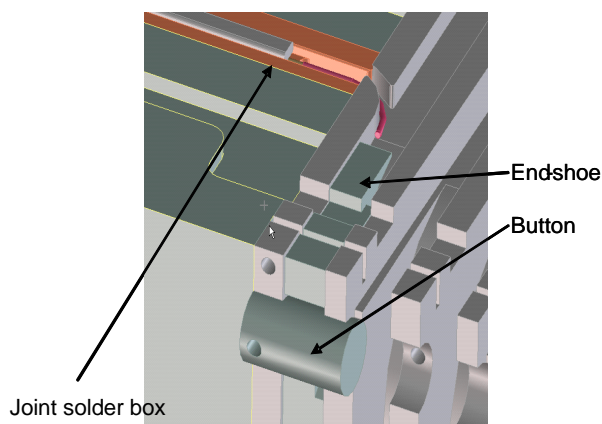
A winding model with a Nb₃Sn wire coming from the NbTi to Nb₃Sn solder box for making the wire connection into the first coil pack. A winding button and its end shoe are also shown.
